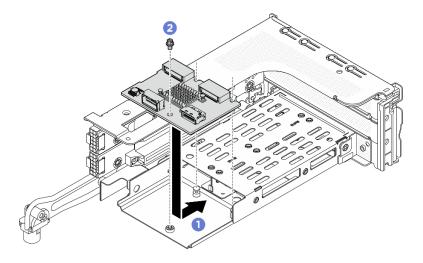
Installing the M.2 backplane to 3FH M.2 riser cage
